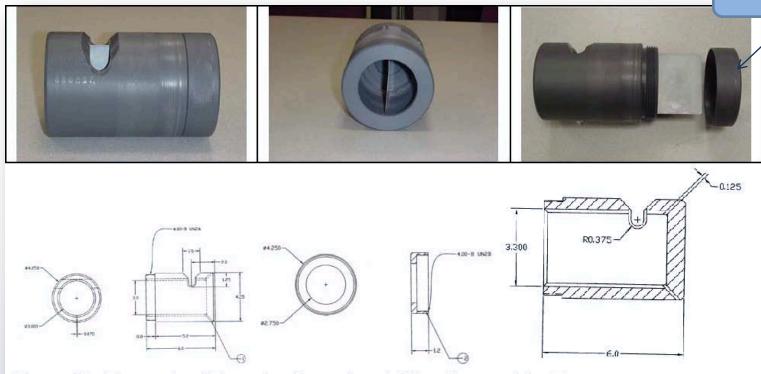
Fixture for "Throwing Power" and Alloy Composition Test
